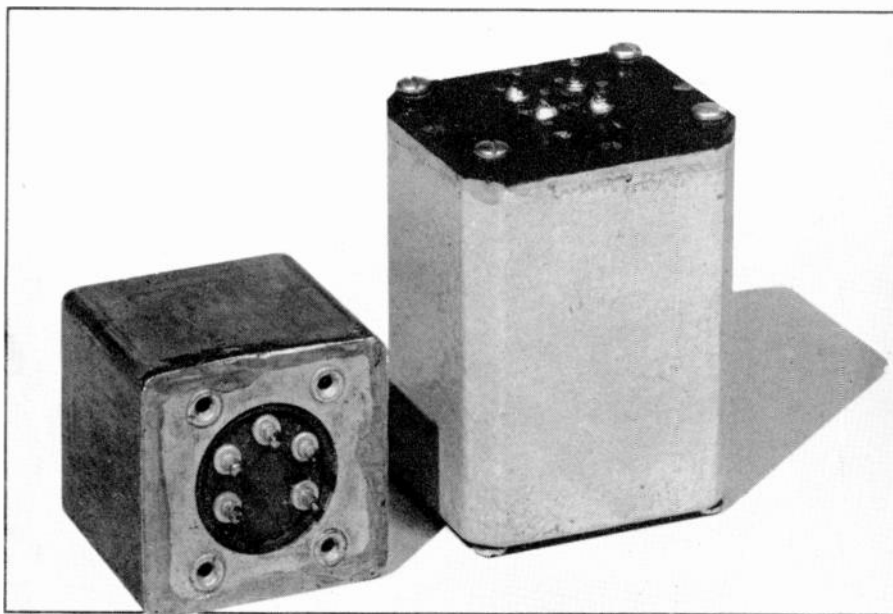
LEFT, A TRANSFORMER CASE SEALED AS IN FIG. 2, PHOTOGRAPHED IMMEDIATELY AFTER SOLDERING. RIGHT, CAST STEEL CASE CONSTRUCTION
